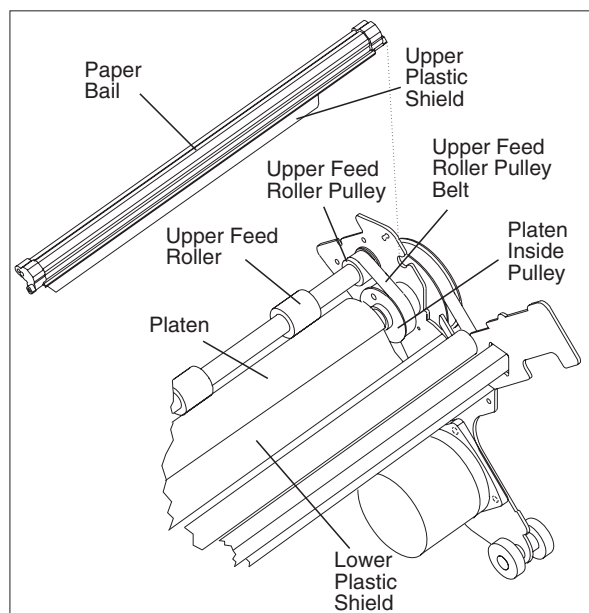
Paper Feed Main Drive. (Viewed From Top)
